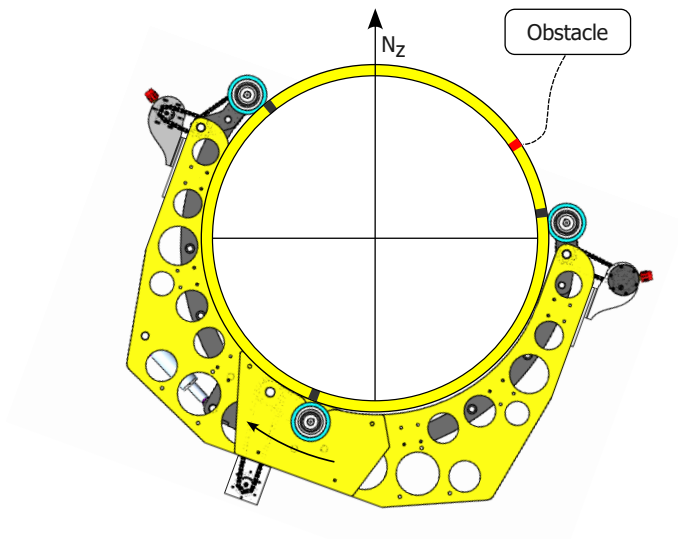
Position of the welding seam, shown in red, serving as an optical for the crawler.
